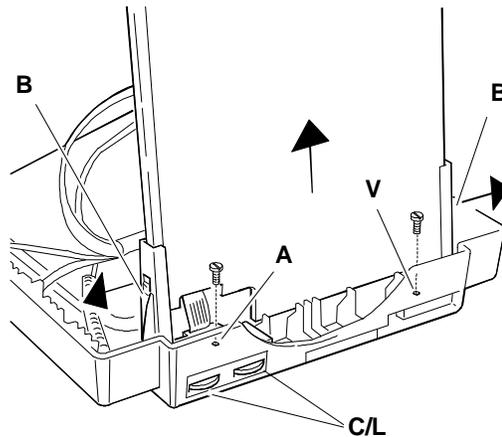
Removal of the Main Board Structure from the Video Casing
